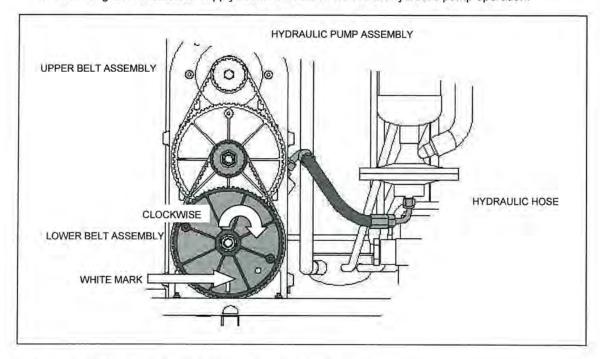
LOWER PULLEY AT THE 6 O'CLOCK POSITION (BDC)
